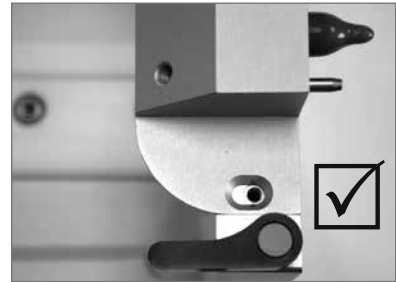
B: Proper alignment of the electronics housing assembly with the interface flange
